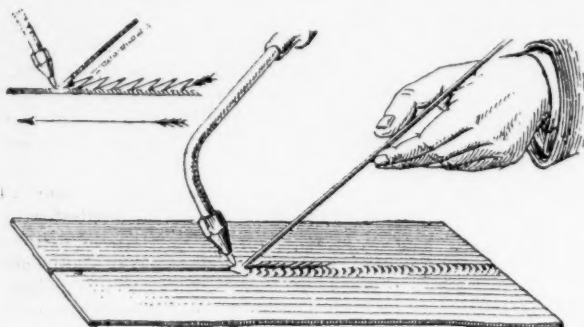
WELDING OF THICK SHEETS OF METAL
